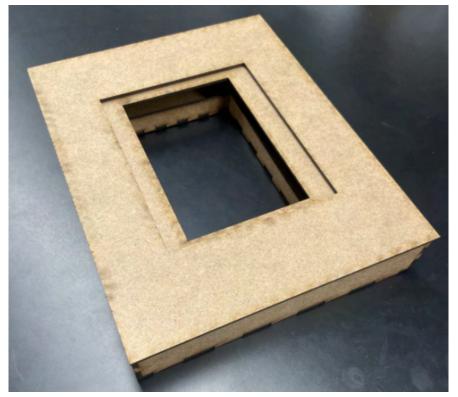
Photo of the laser cut HDF prototype with all the pieces assembled together.
